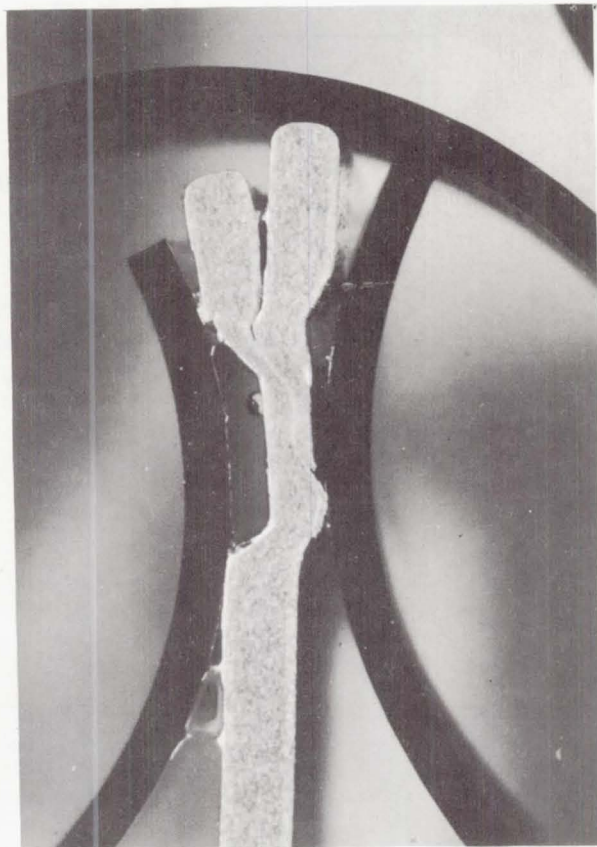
Weld Resulting From Eccentric Dies
